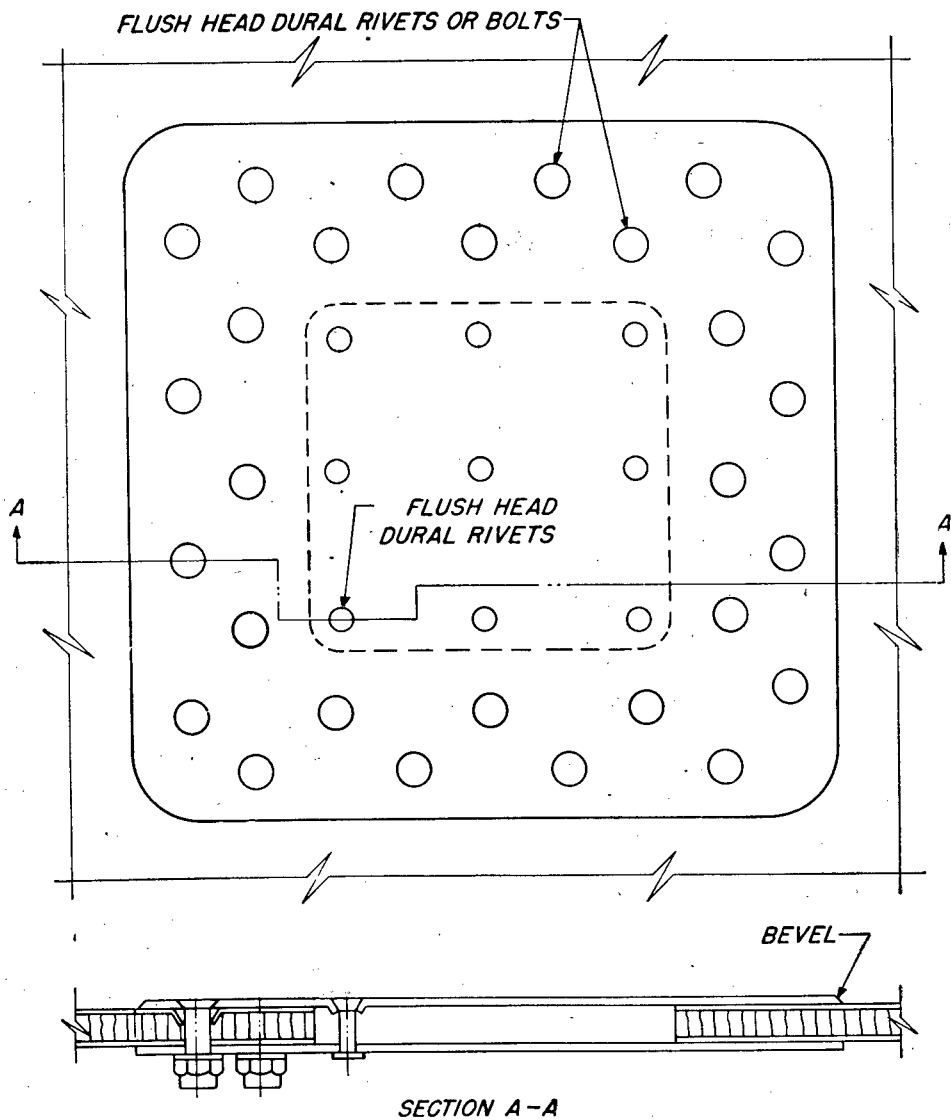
Typical patch-plate repair in sandwich parts having aluminum facings and a balsa core.
